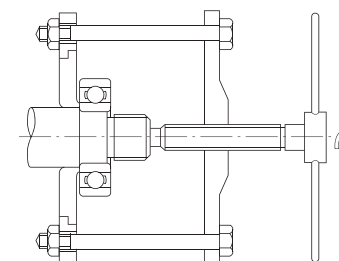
Removal of Outer Ring with Dismounting Bolts
